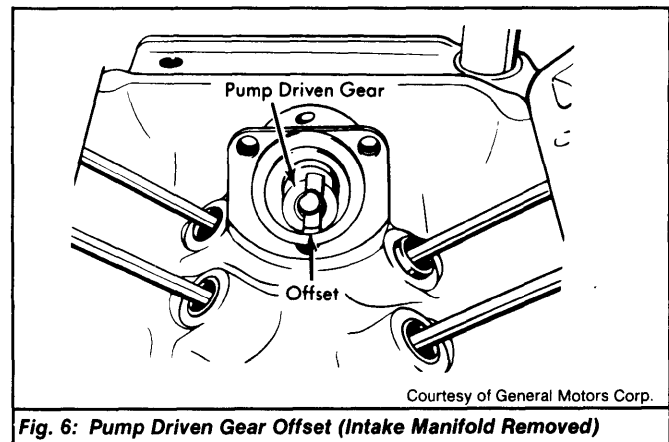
Pump Driven Gear Offset (Intake Manifold Removed)
